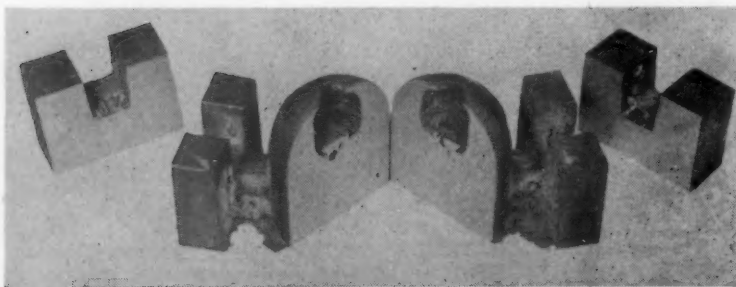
KEEL BLOCK CASTING WITH RISER OPEN TO ATMOSPHERE.
